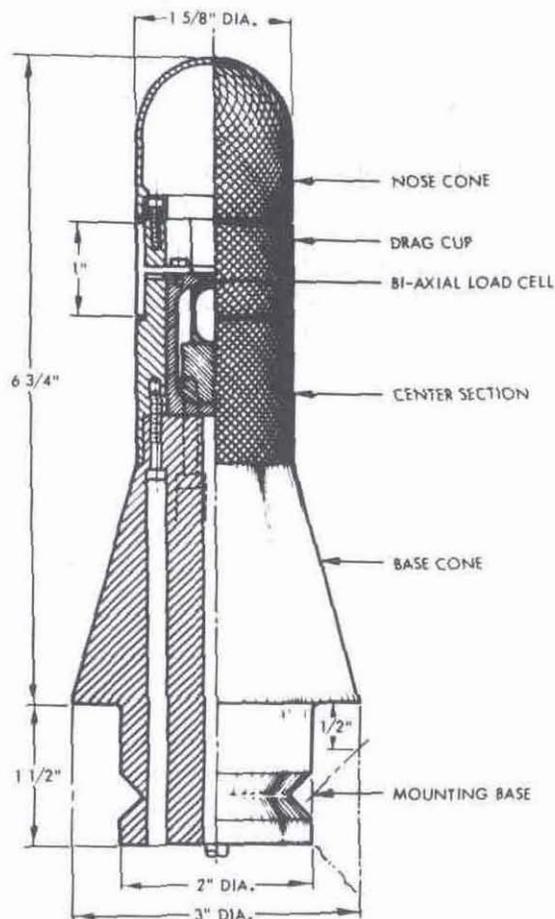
Assembly drawing of BRL bi-axial drag gage.
